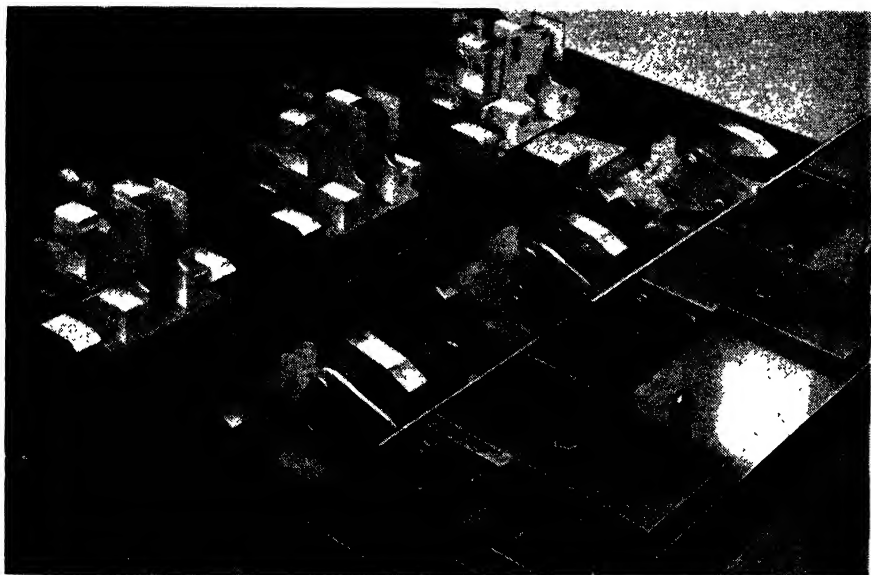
Contact system in open position with arc chutes removed. (The English Electric Co. Ltd.).
